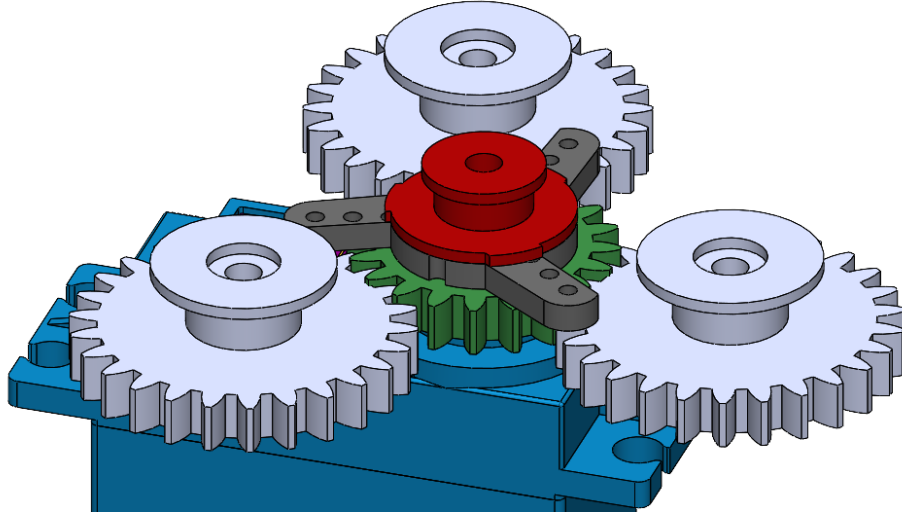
System for opening doors containing solar panels by using winches and torsion springs. Green - Driven gear, Gray - Driven gear with spool for wire collection
